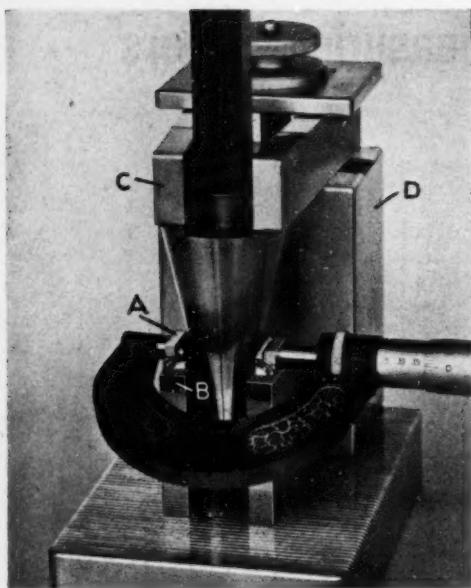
The Special Stand which is Available for Checking Components with Reference to the Large-diameter End Face
